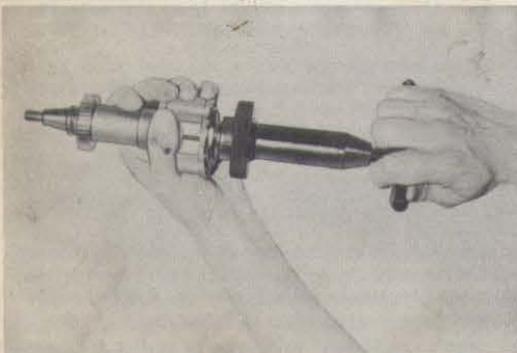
Removing Inside Ball Race From Breaker End of Rotating Magnet
